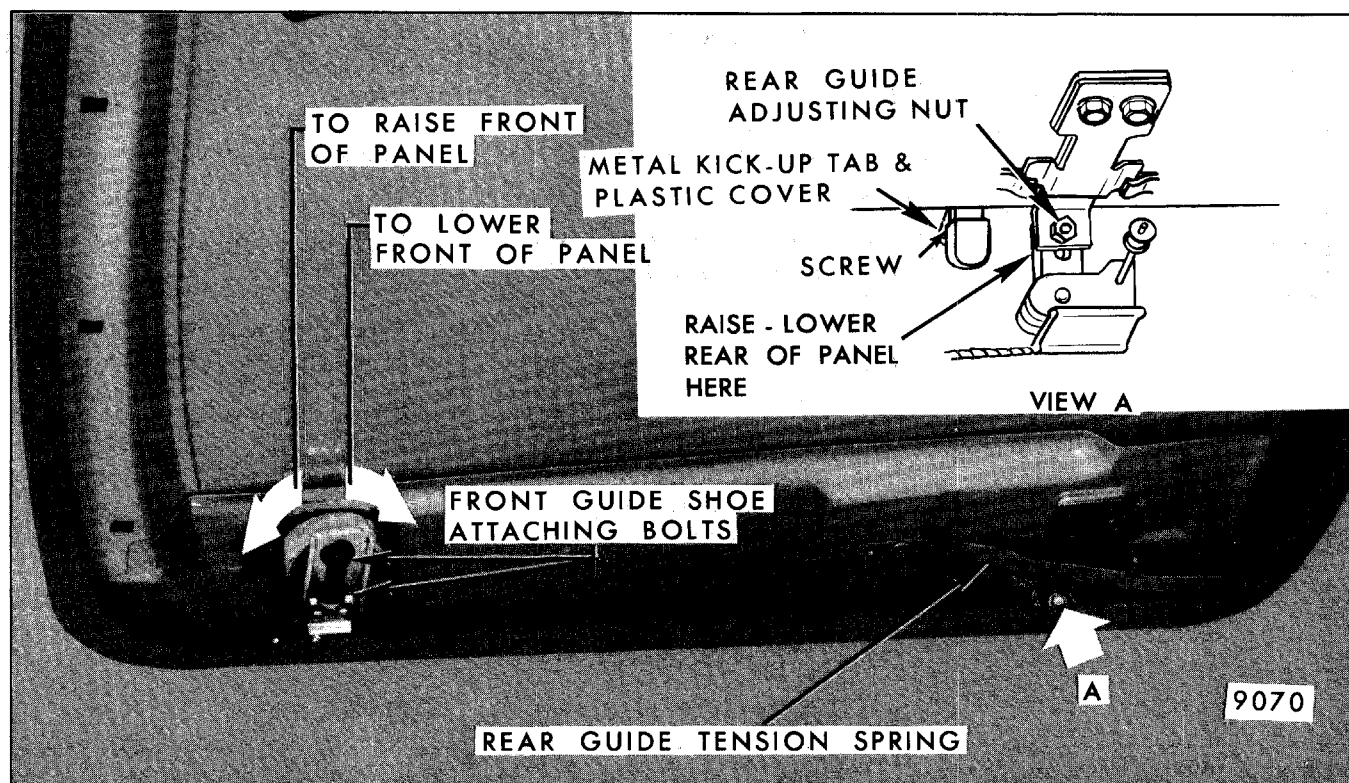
Sun Roof Panel Vertical Adjustment Provisions
